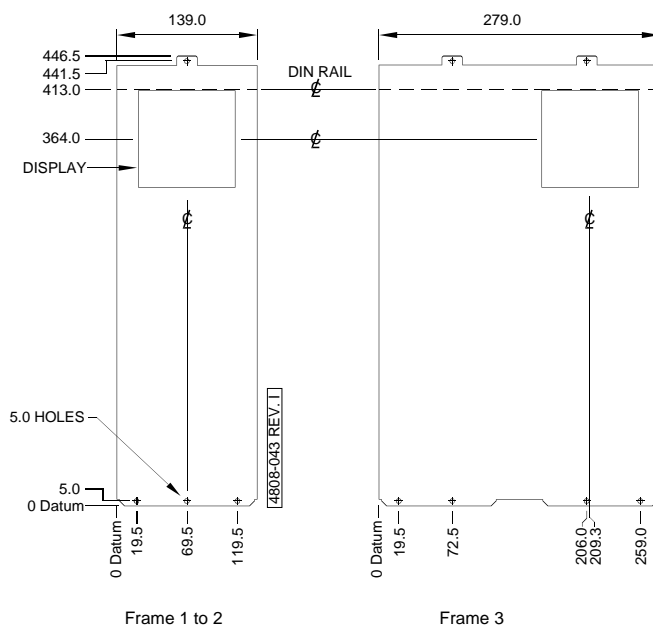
Standard Mounting Details for Microdrive E-Series
